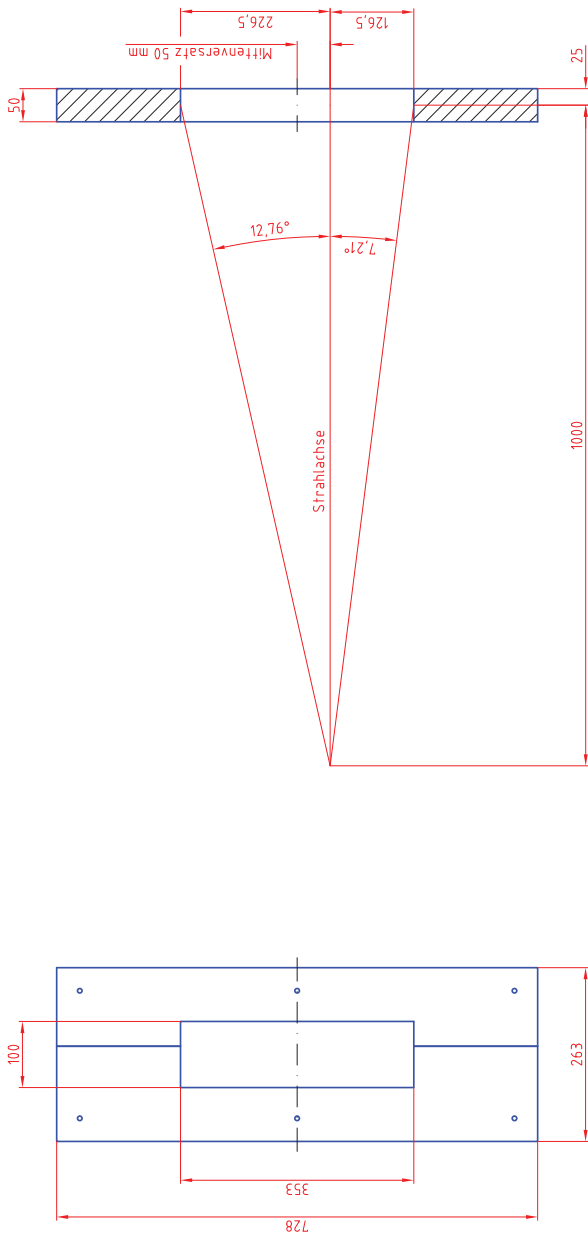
Technical drawing of the rectangular shaped lower collimator used for the kaon electro-production measurements with the KAOS spectrometer.
